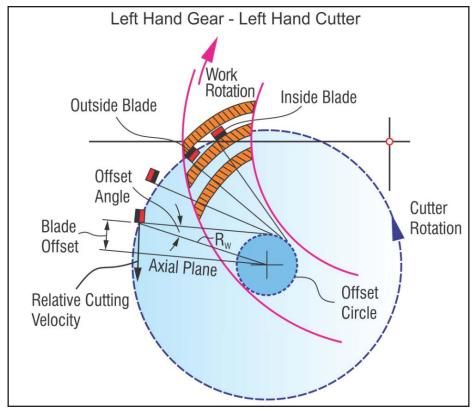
Face hobbing, left-hand gear with left-hand cutter head.
